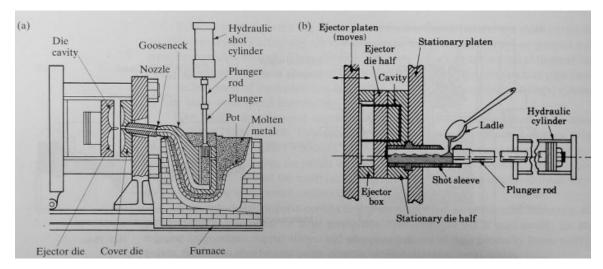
(a) Hot chamber die casting (b) Cold chamber die casting [source: Kalpakjian & Schmid]
